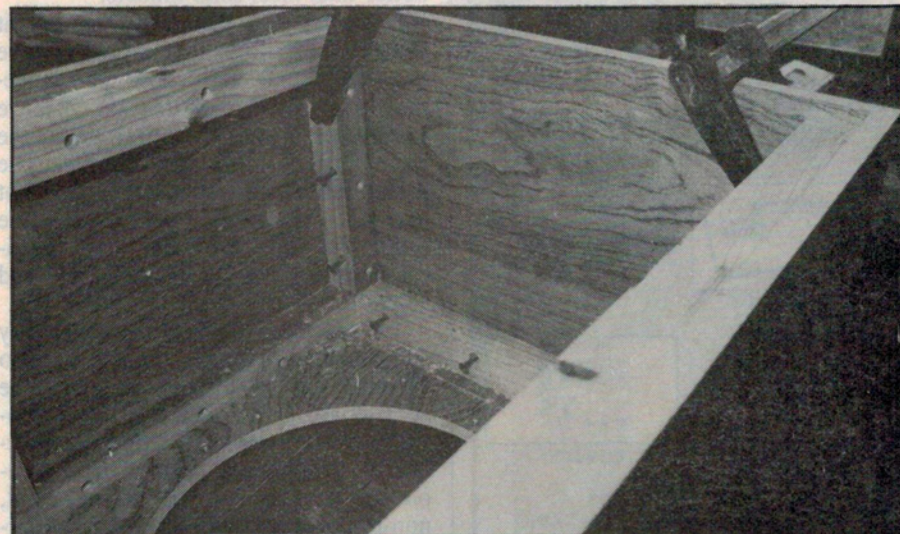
the partly assembled enclosure. Note the use of 45mm square cleats along the inside edges. The cleats should be glued and screwed into position as outlined in the text.
